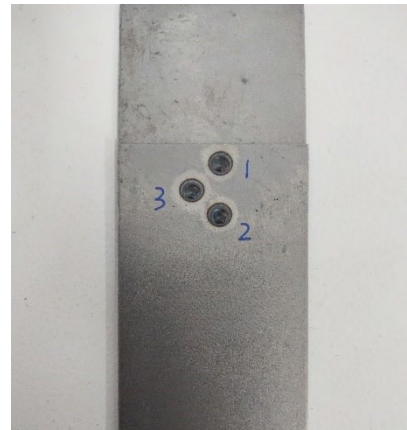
Weld joints in shunt condition (adaptive)
